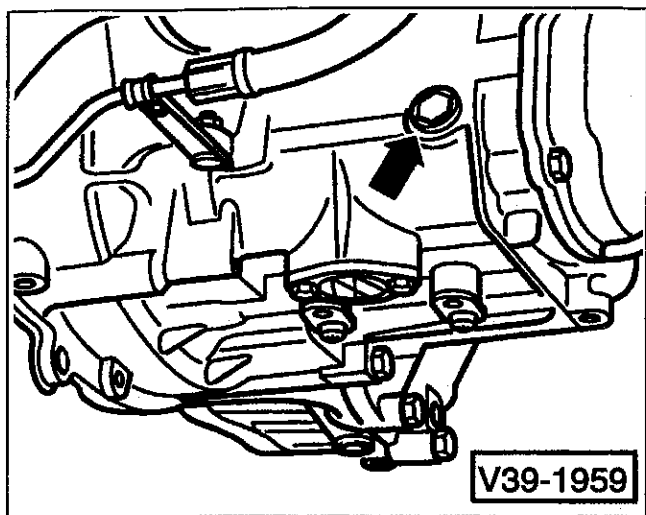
020 manual transmission used on cars with 4-cylinder engines. Remove oil filler plug (arrow) to check oil level.
